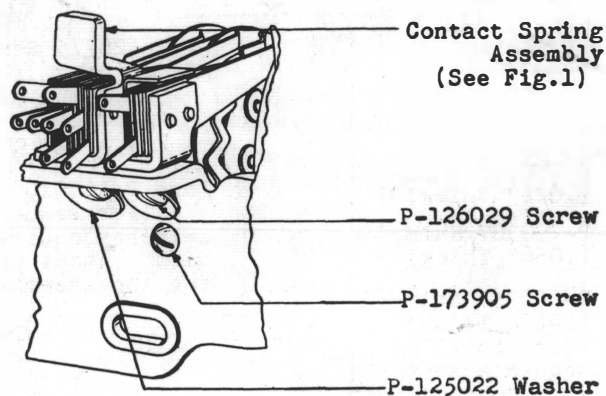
Contact Spring Assembly Mounting Screws and Washer. Index Tab at Rear of Spring Assembly Mounting Bracket
